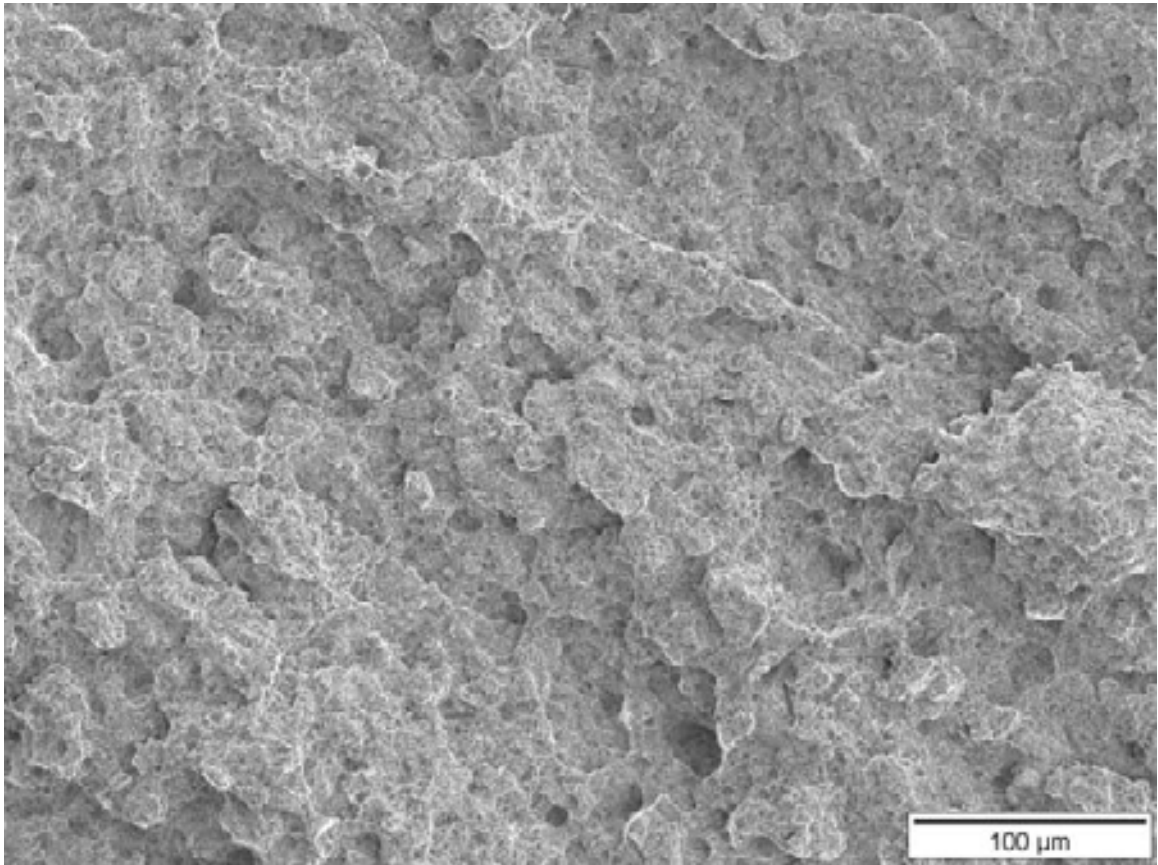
Fracture surface of extruded Ti-6Al-4V-1.6B modified alloy showing a jagged fracture surface, suggesting brittle fracture.
